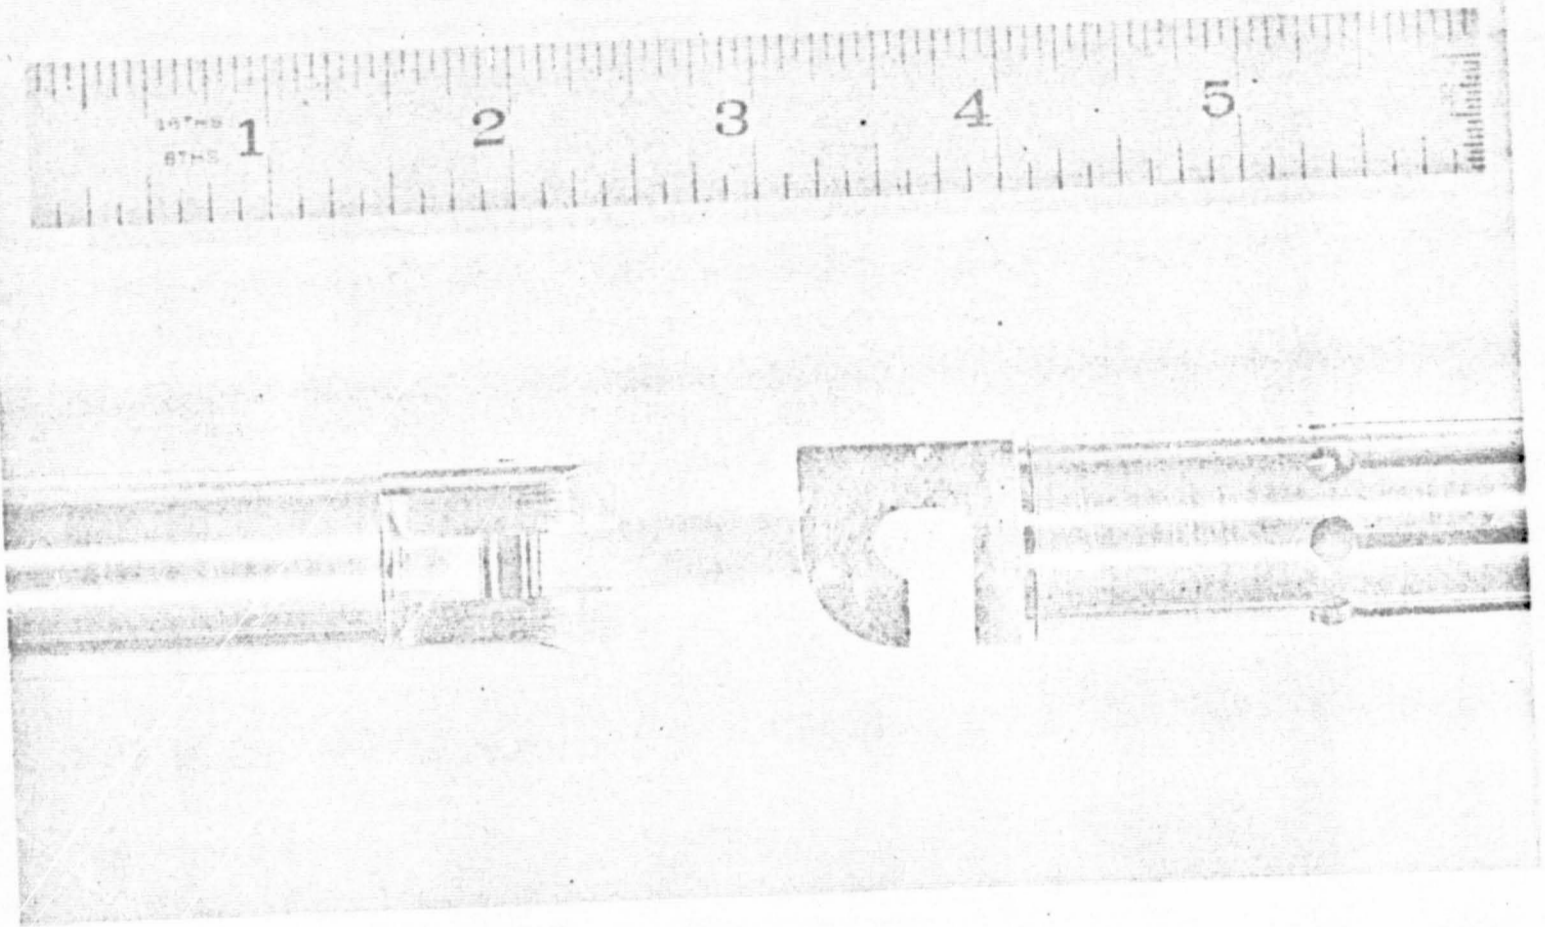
The knuckle joint, core liner tube on left and core lock on right.
